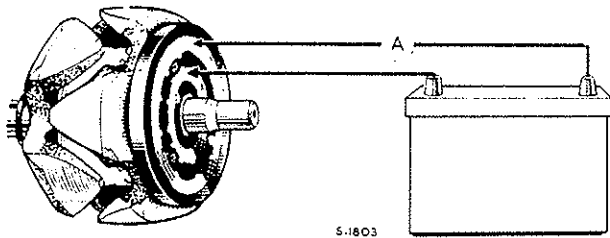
Measuring rotor winding resistance with battery and ammeter
